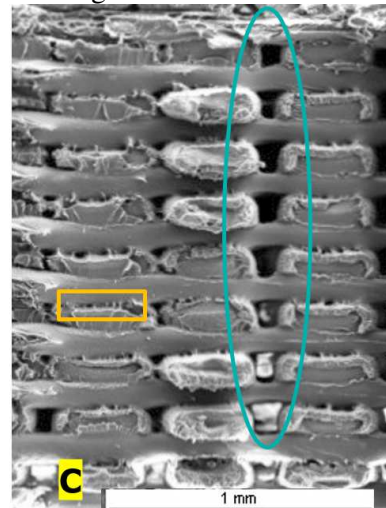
Fracture surface of 0,1 mm specimen with defects
